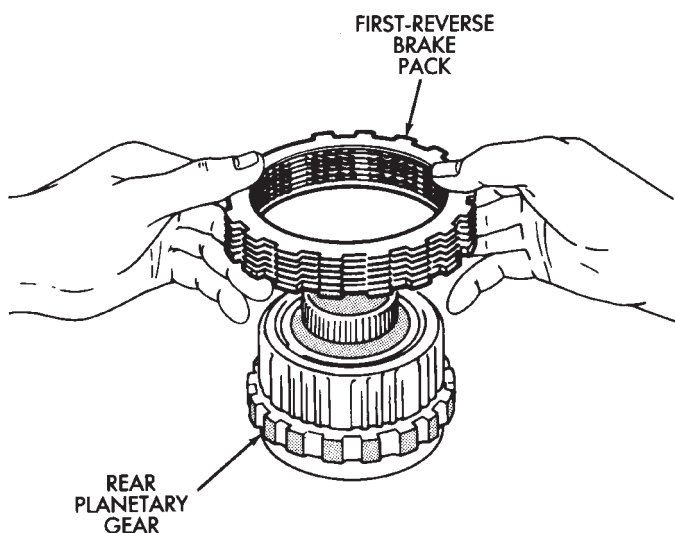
Removing/Installing First-Reverse Brake Pack J8921-606
